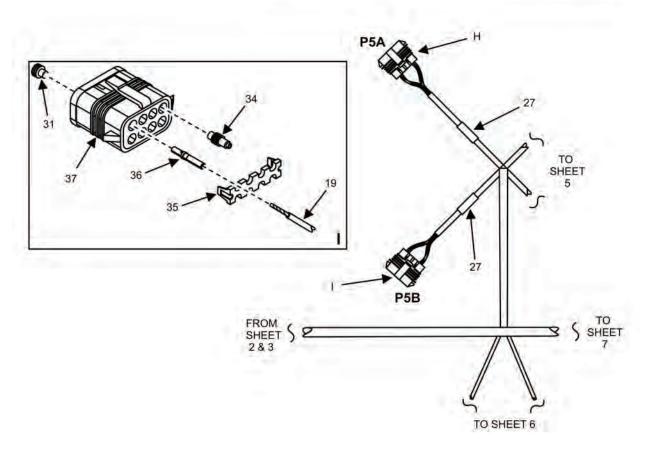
Engine Wiring Harness (Sheet 4 of 15).
